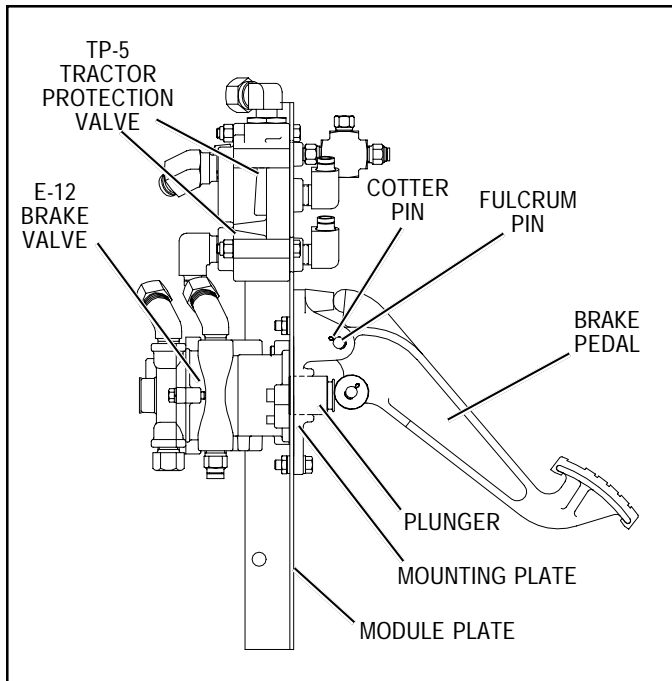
BCM-KW MODULE: BRAKE PEDAL REMOVAL
